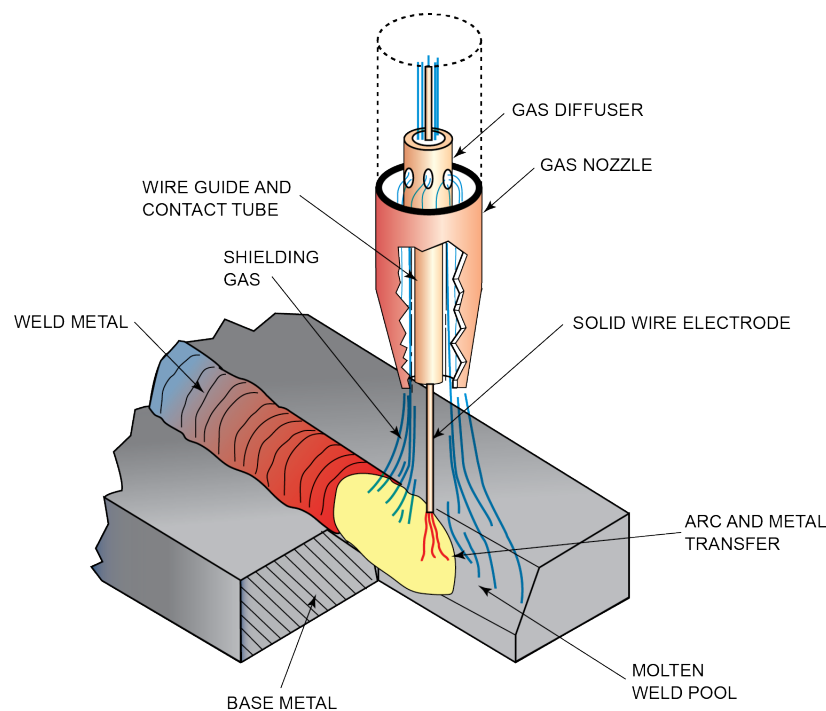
Cut-out of a GMAW nozzle during welding and feed-through of the electrode. [40]
